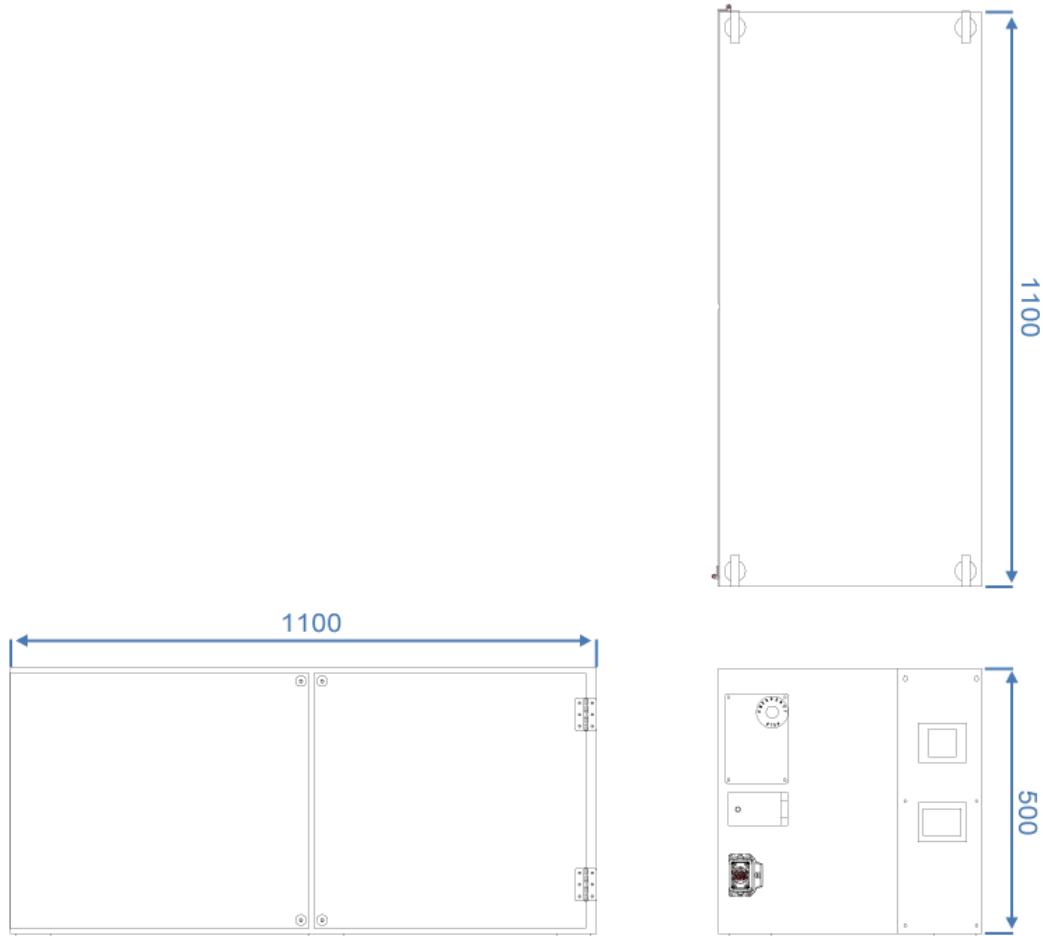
Dimension of Hi5-C20 (Unit:mm)
